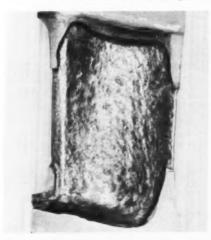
Illustration showing rough pitted results obtained when solution is too hot.
